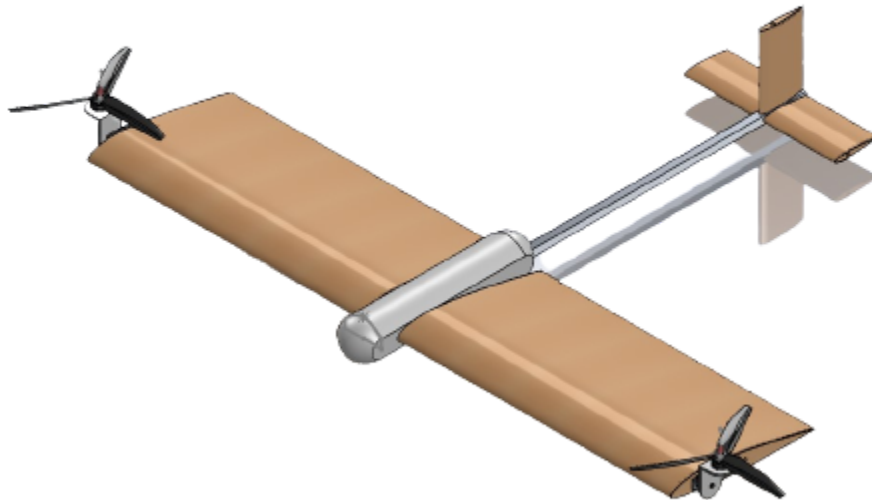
Isometric View of Tilt Rotor Drone Prototype Assembly
